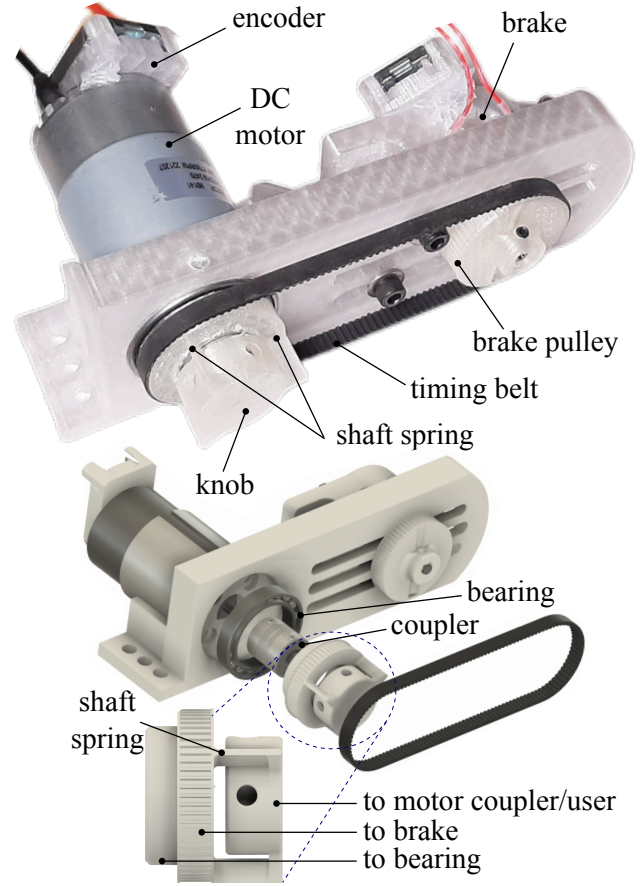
Actuator prototype. The shaft spring is a semi-rigid 3D printed part that connects the knob to the brake, adding a small compliance between the user/motor and the brake. A particle brake is connected to the knob with a timing belt. An encoder measures the position of the motor's shaft.
